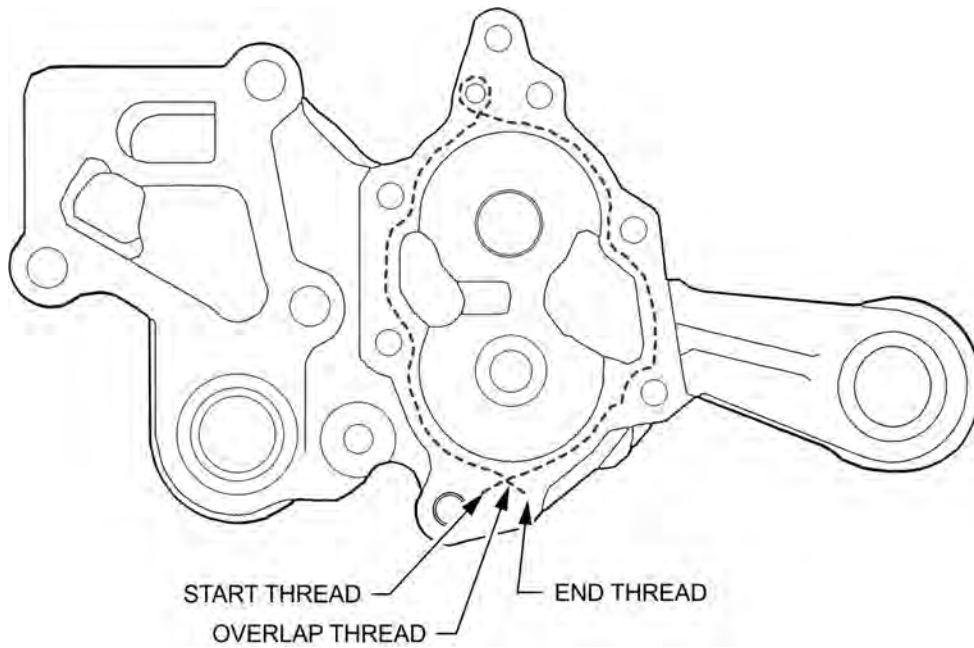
Threading Diagram, Oil Pump Assemblies 631149, 632970, 632977, 654437, 655349, & 655680
